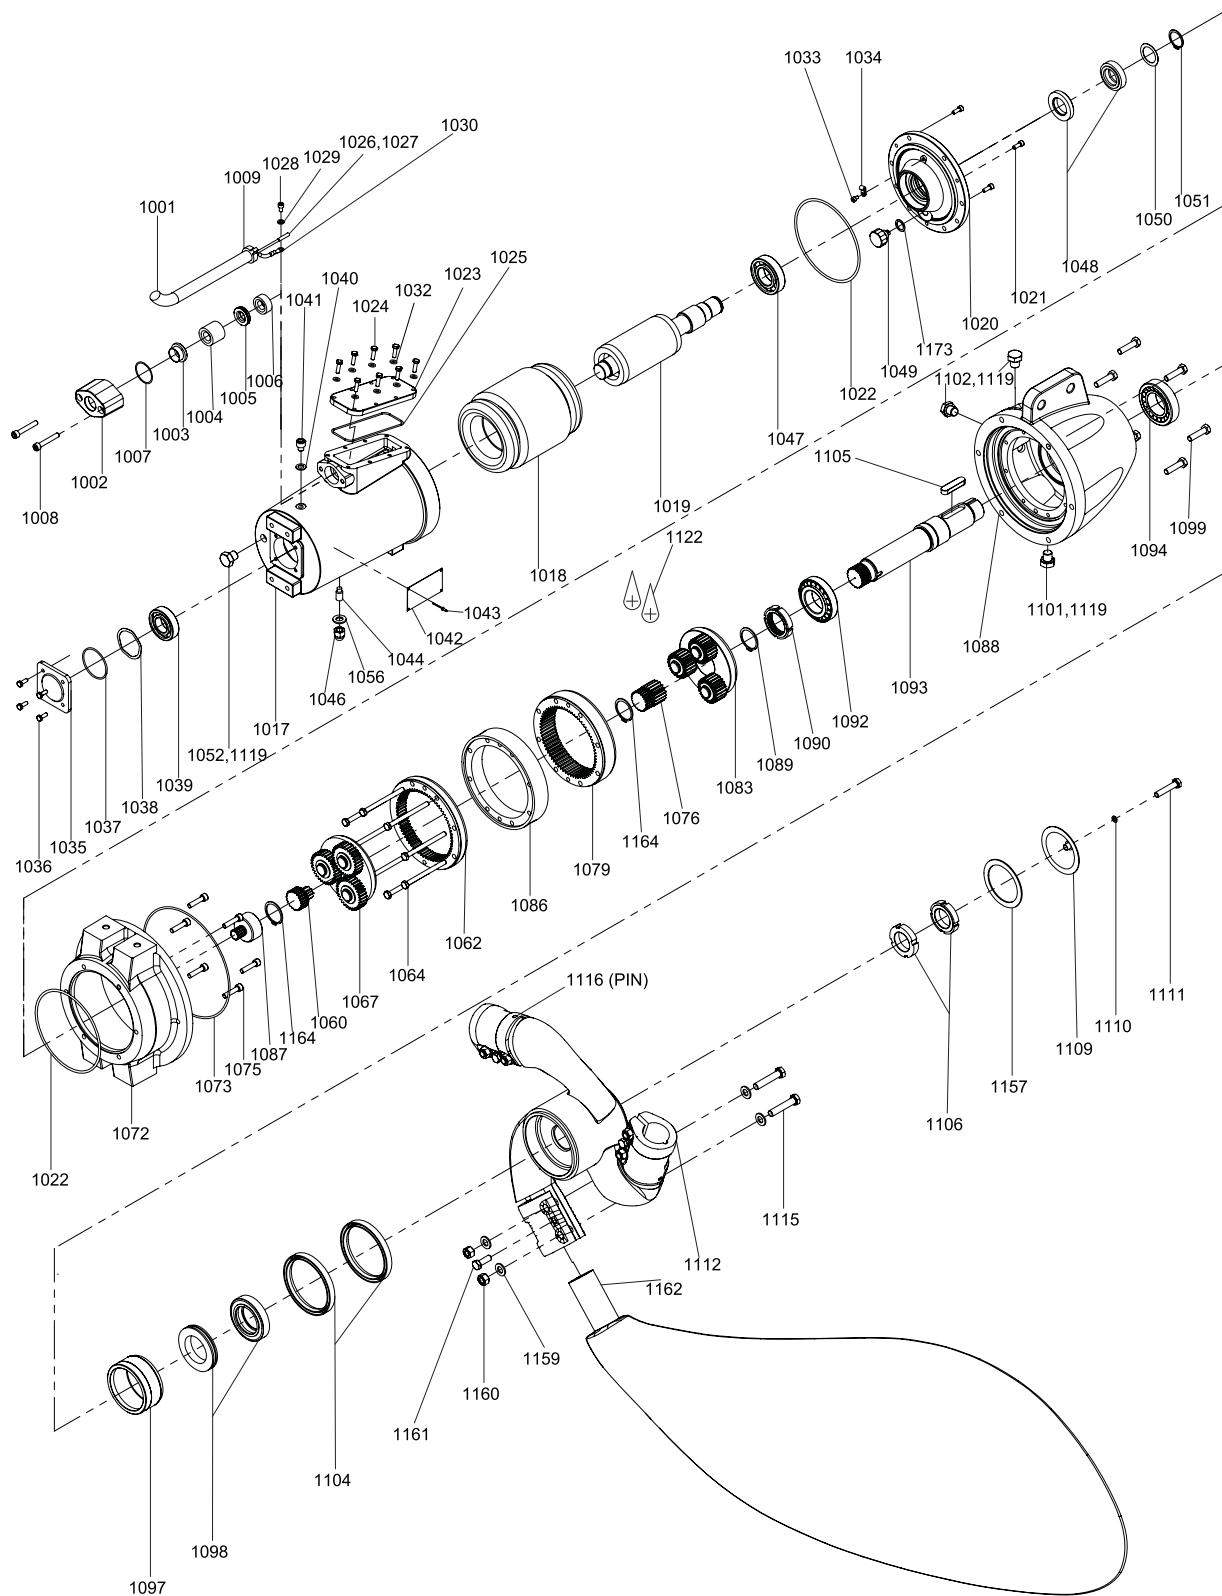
Exploded view, SFG.xx.71.xx and SFG.xx.91.xx
